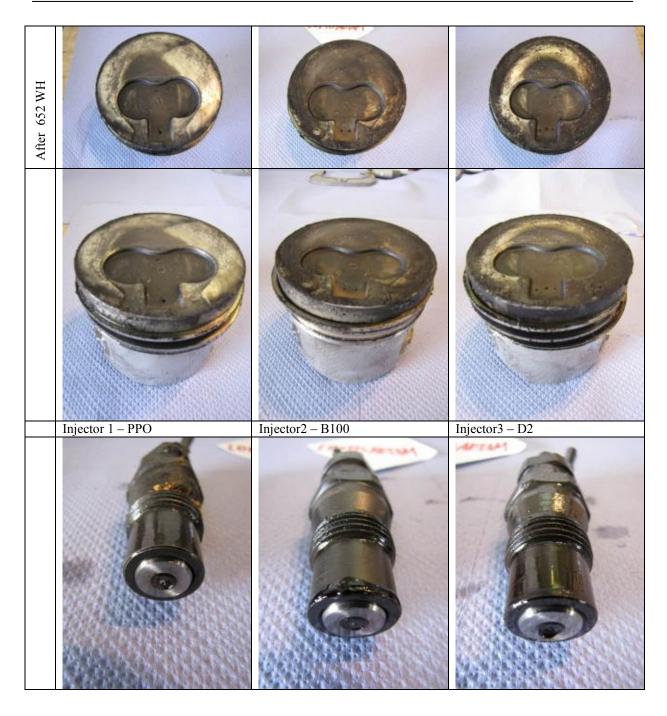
Photos of tractor AGT 835 engine parts after disassembling the engine, 20.9.2011 after 652 working hours.
